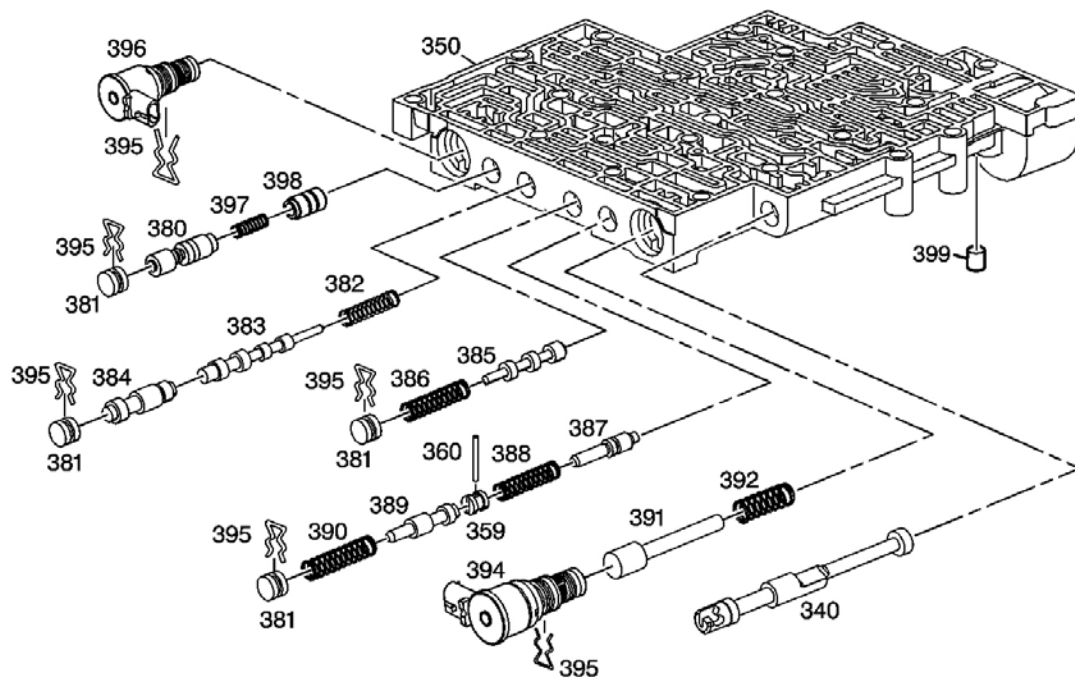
Control Valve Body Assembly Disassembled View (2 Of 2)
